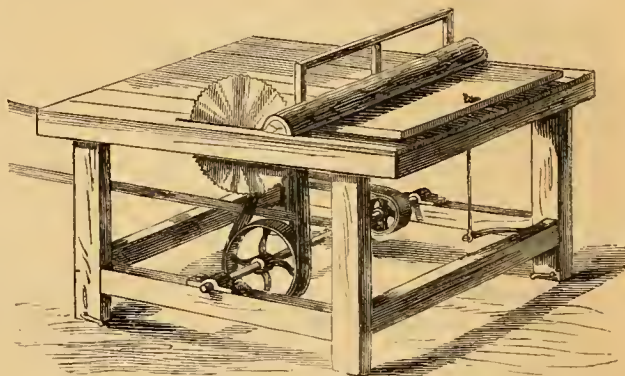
SAW WITH SLIDING CARRIAGE.
